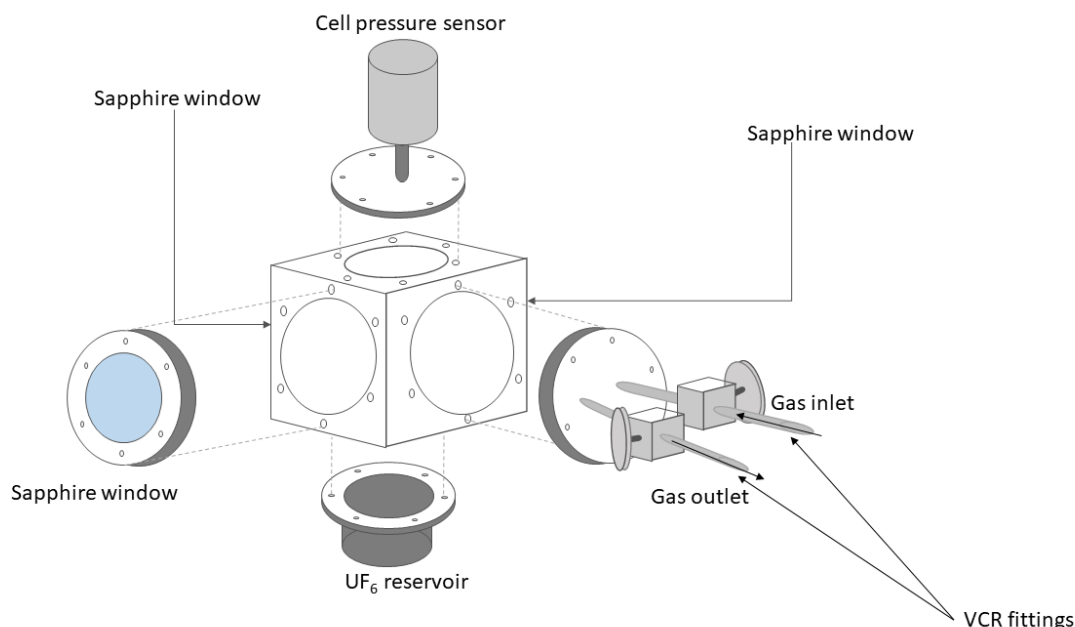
CAD drawing of the final cell design with three sapphire windows.
